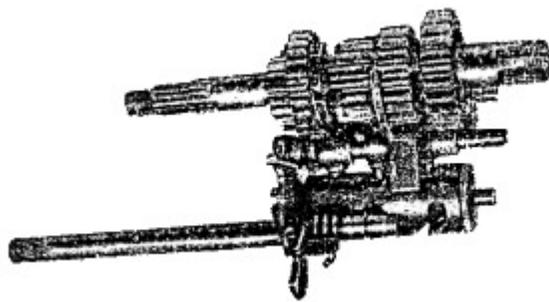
Gearbox with gear-shift mechanism (view from top)
